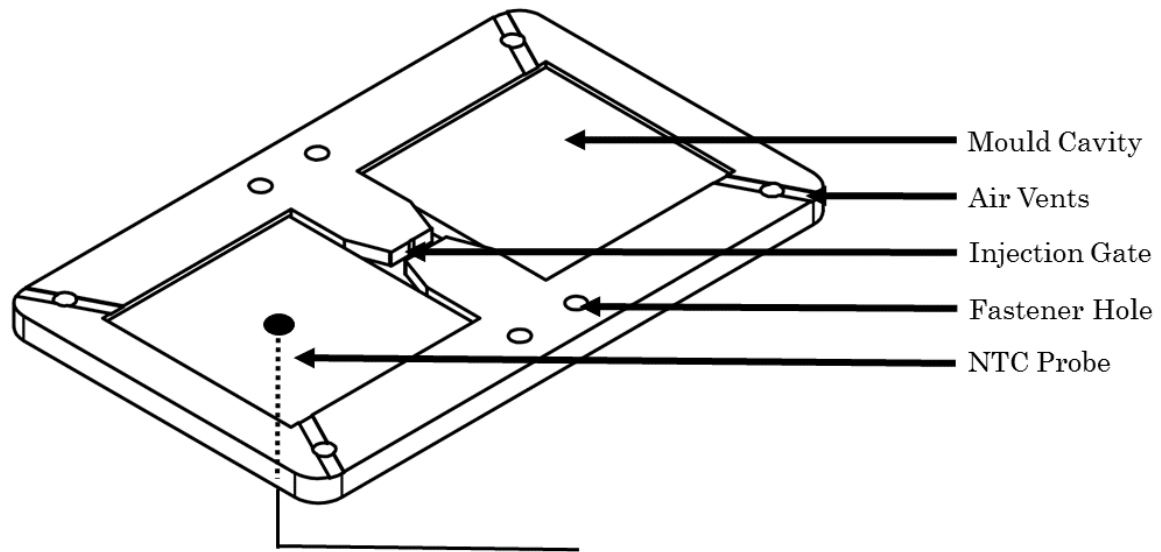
3D printed ABS test mould with embedded NTC thermistor.
